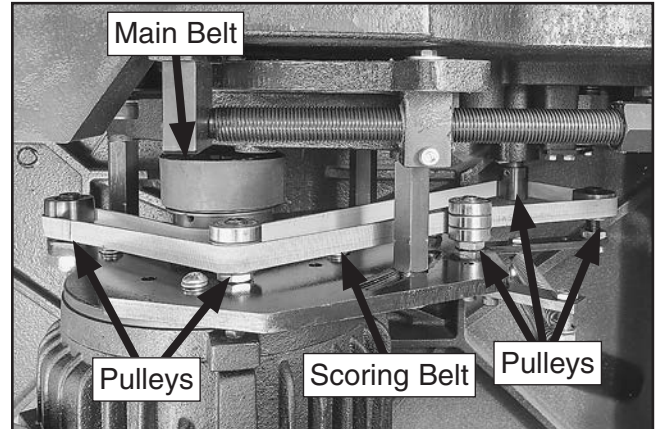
Scoring belt installed onto pulleys (cast-iron table removed for clarity).
